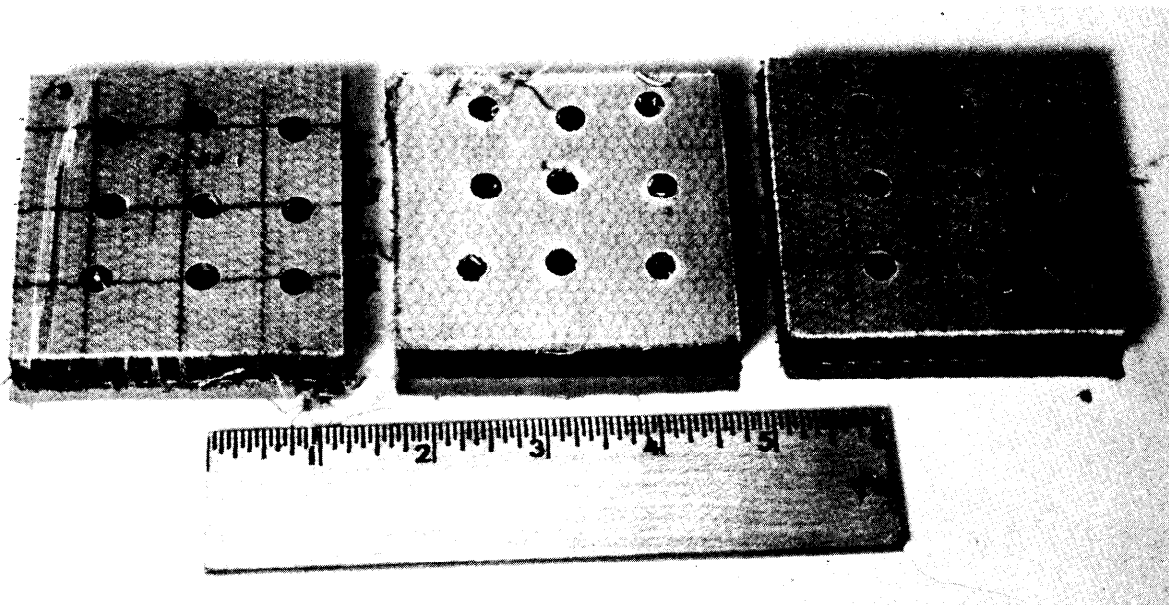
DRILL: .250 SPADE DRILL
